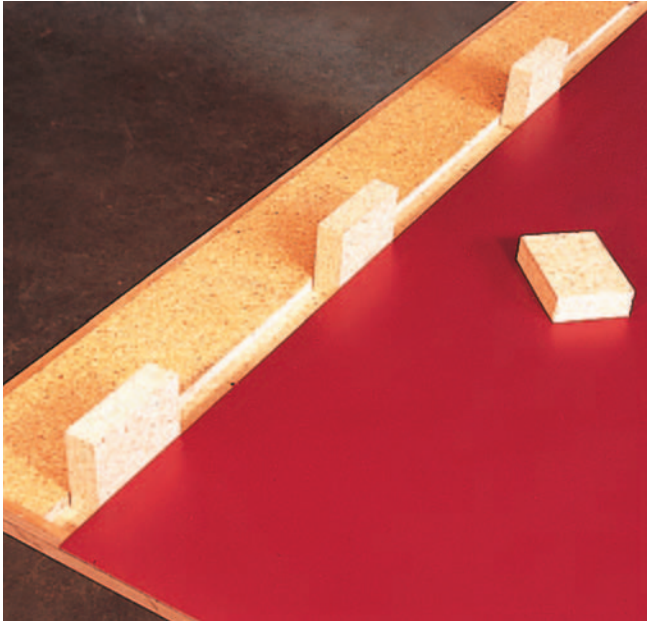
Use 3/4"-thick scrap blocks to line up the laminate with the edges of the two grooves.
